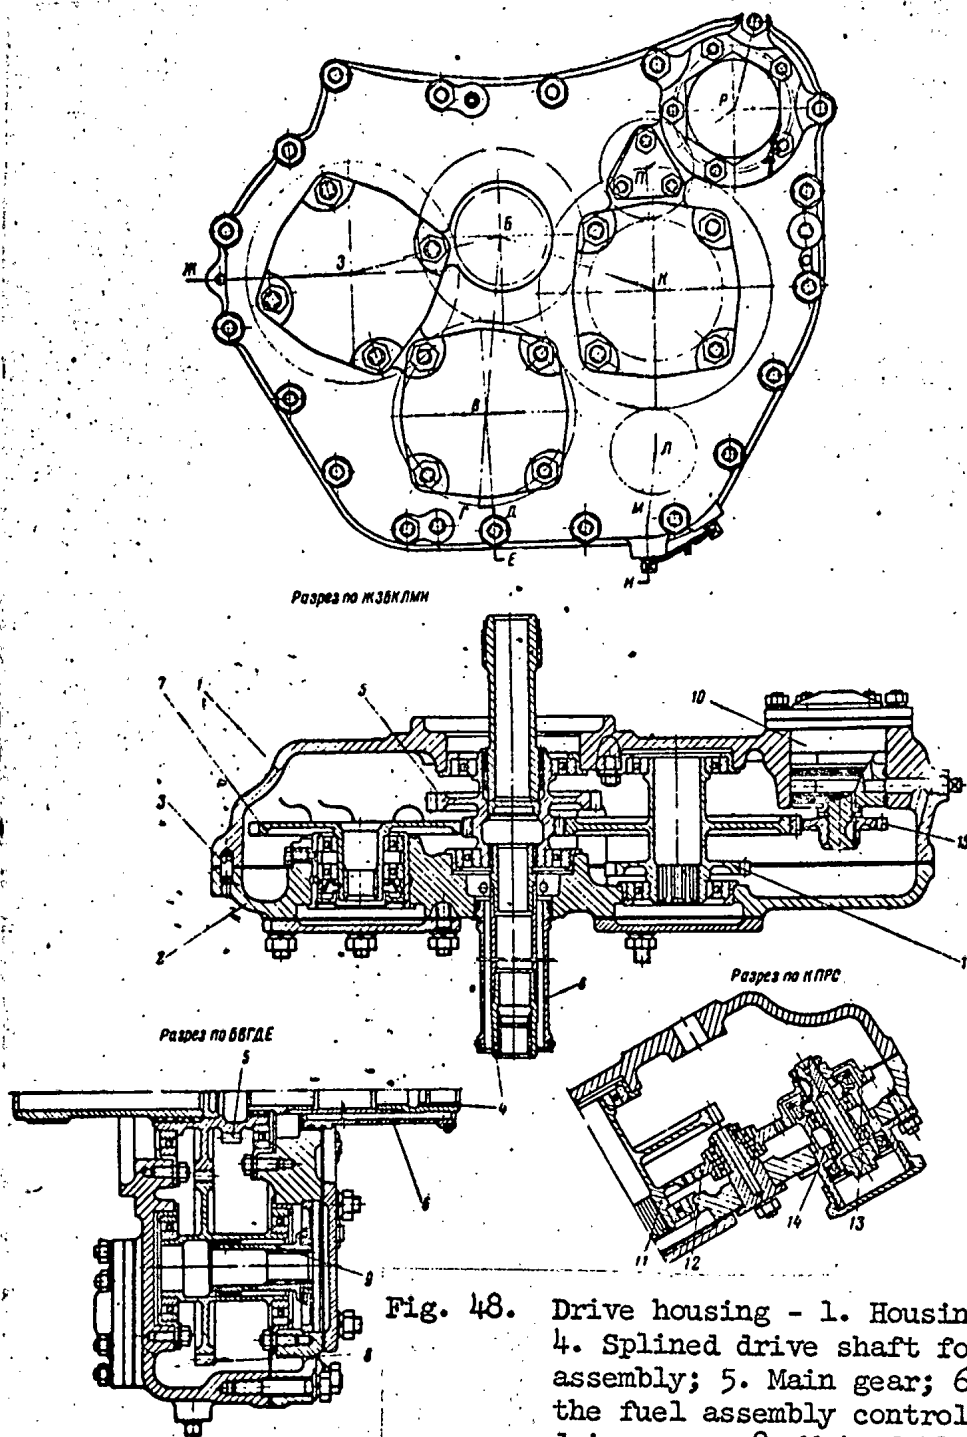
Drive housing - 1. Housing; 2. Cover; 3. Pin; 4. Splined drive shaft for control of fuel assembly; 5. Main gear; 6. Tubular shield for the fuel assembly control shaft; 7. Fuel pump drive gear; 8. Main fuel pump drive gear; 9. Main fuel pump splined drive shaft; 10. Hydraulic pump drive gear; 11. Tachometer transmitter drive gear; 12. Intermediate gear; 13. Driven gear; 14. Transmission housing; 15. Scavenge pump drive gear
